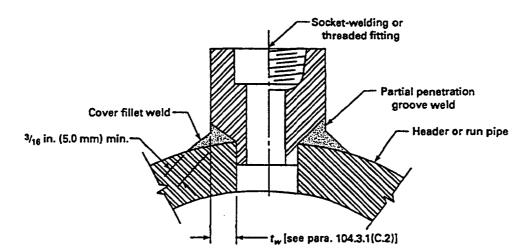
(F) TYPICAL PARTIAL PENETRATION WELD BRANCH CONNECTION FOR NPS 2 AND SMALLER FITTINGS
